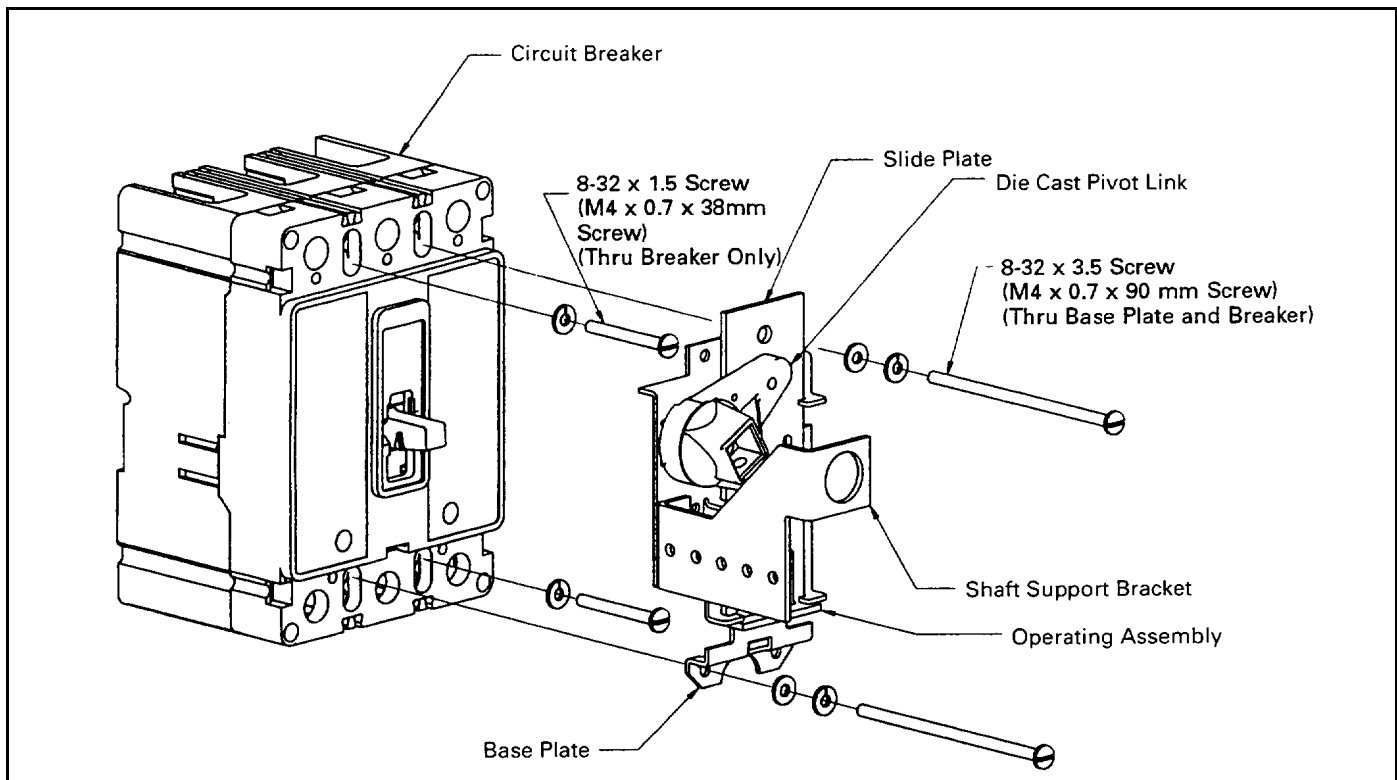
F-Frame Breaker/Mechanism Assembly
